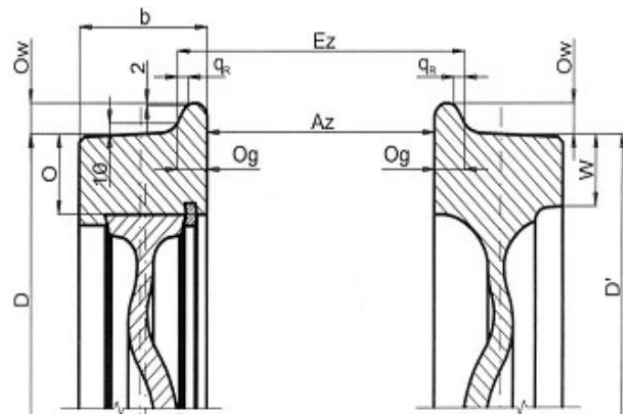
Cross-section of wheels (rimmed and monoblock) with marked geometrical parameters [6]
